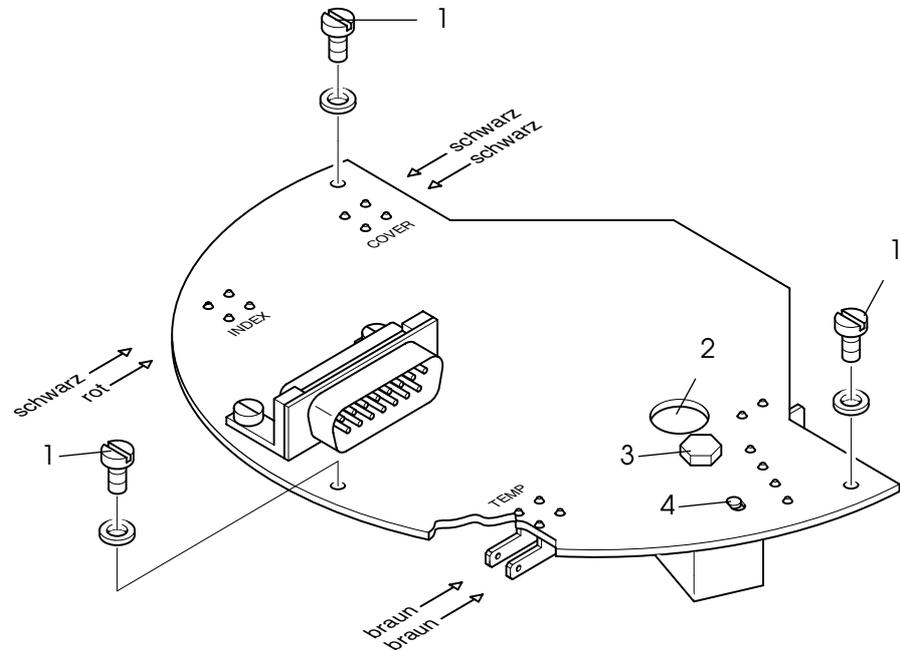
Double Head Pump: Spare parts of mast-mounted double head pump (2)
